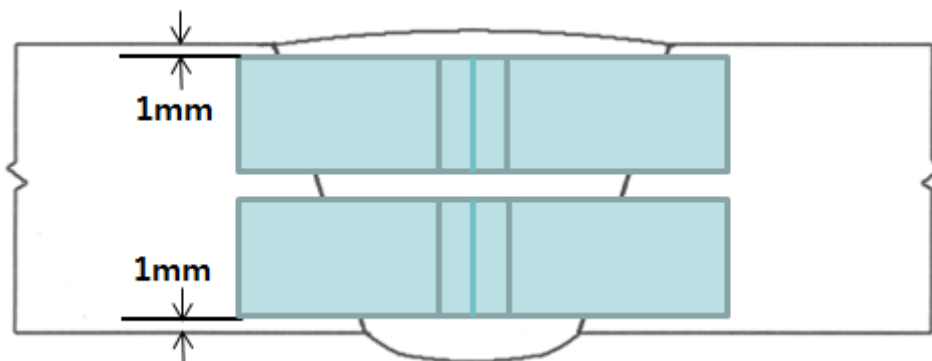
Test specimen location for deposited weld metal Charpy V-notch impact test
